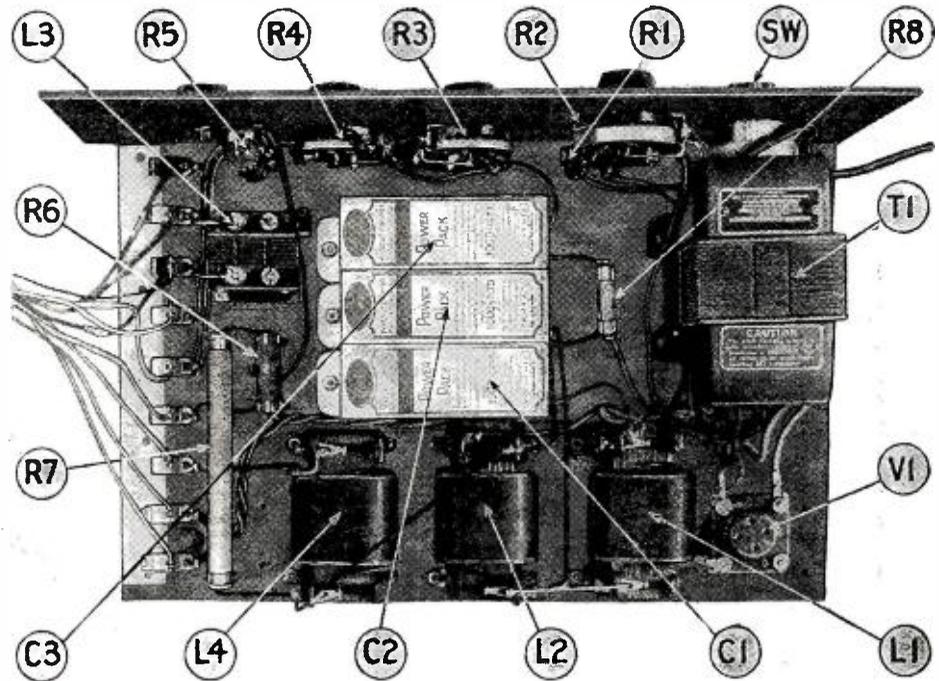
Fig. B. The exact position of all parts mounted on the baseboard is shown in this top view of the power unit. T1, power transformer; V1, tube socket; L1 and L2, filter-choke coils; L3, detector "B" choke coil; L4, output choke coil; C1, C2 and C3, filter condensers; R6, R7 and R8, fixed resistors; R1, R2, rheostats; R3, R4, grid-bias resistors; R5, "B+Det." control.
